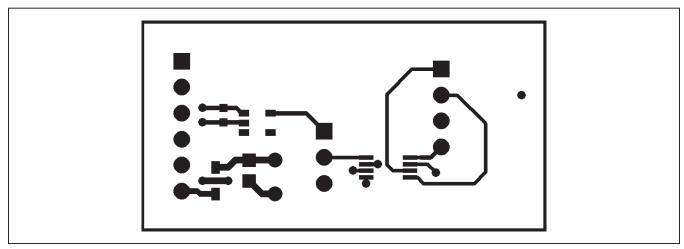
MAX5216PMB1 Peripheral Module PCB Layout—Component Side
